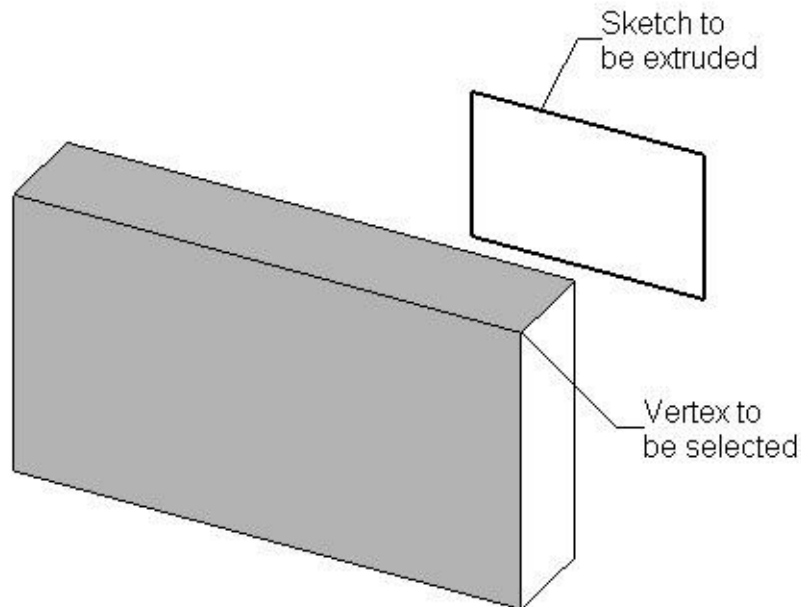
Sketch to be extruded and the reference face selected
